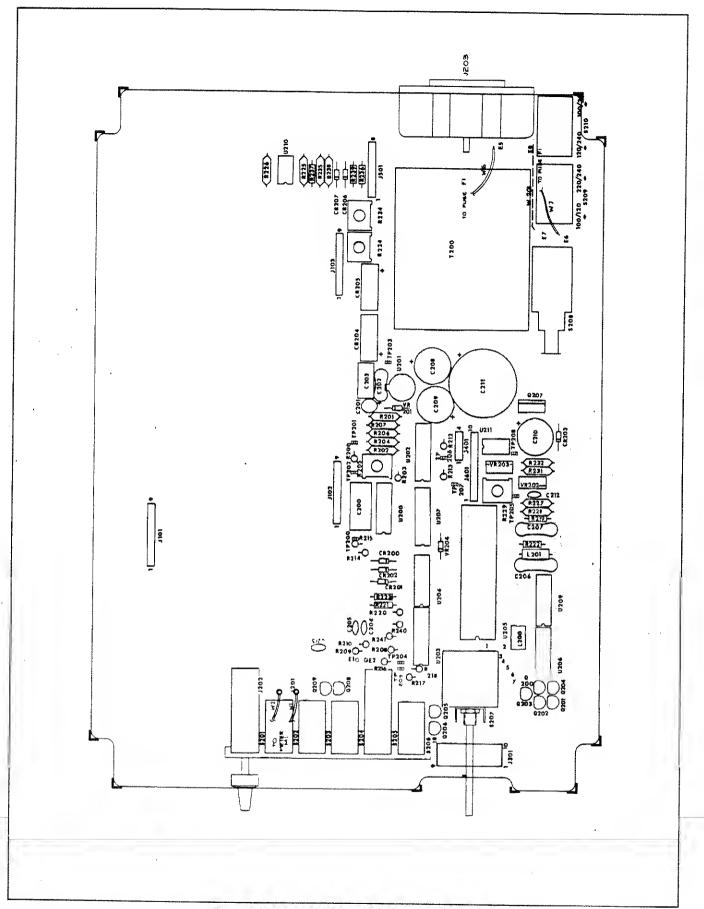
A1 8921A Main PCB Assembly (cont)
